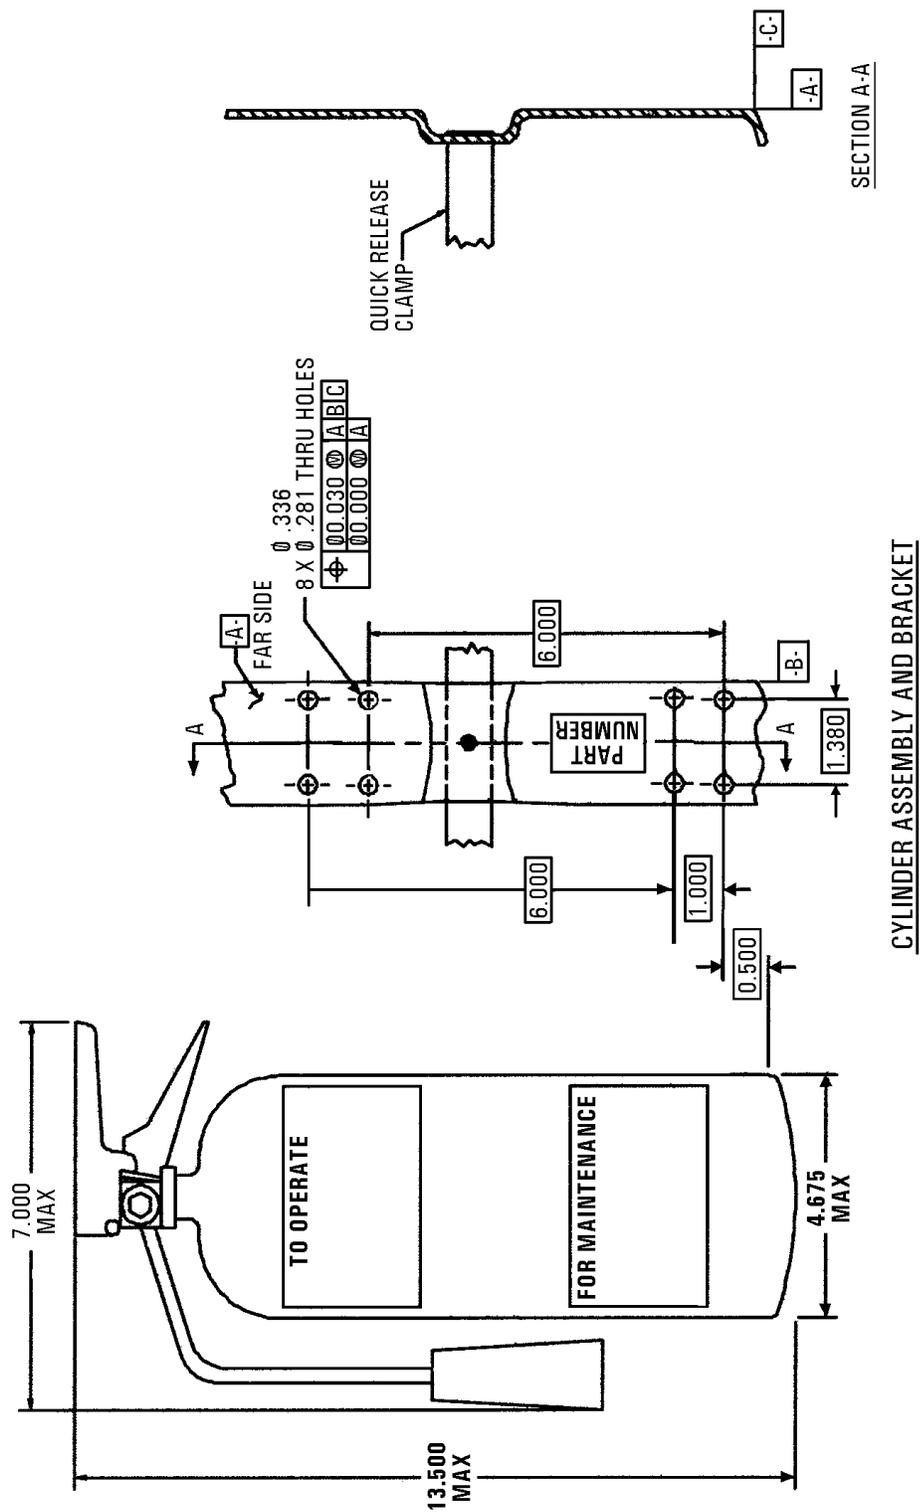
Extinguisher assembly (all dimensions in inches).
